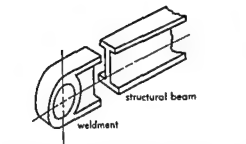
Weldment is a preformed component designed to be welded to other structural or machine components.
